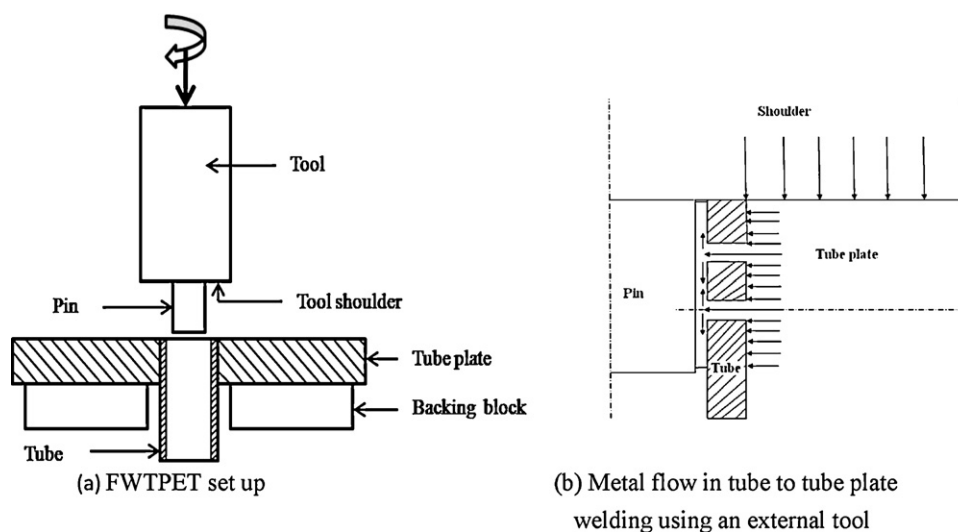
FWTPET process description. (a) FWTPET set up and (b) metal flow in tube to tube plate welding using an external tool.
